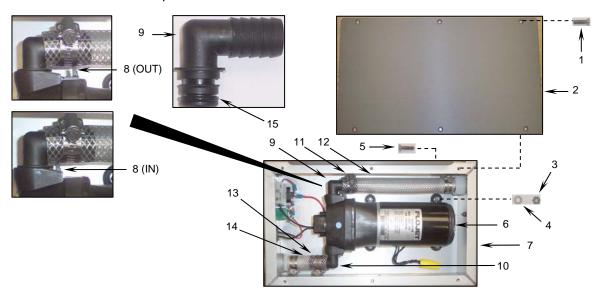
Removing the Sink Fill Pump Assembly Quick Disconnect Elbows.
